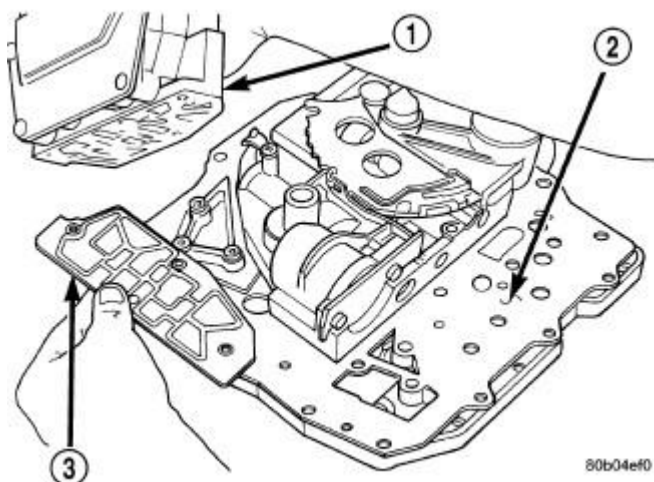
Solenoid/Pressure Switch Assembly & Screen
